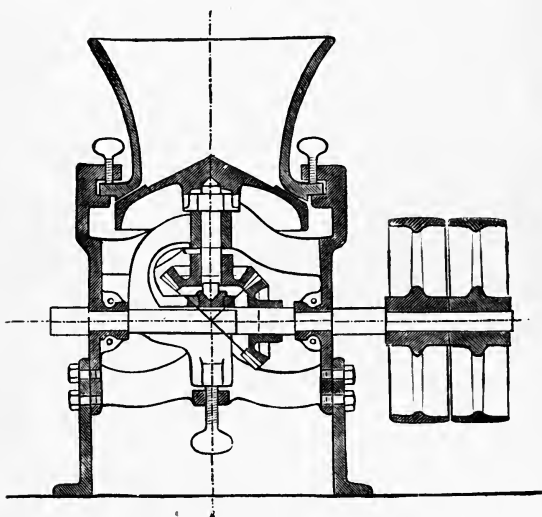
Paint mill with conical grinding surfaces. (For power.)
